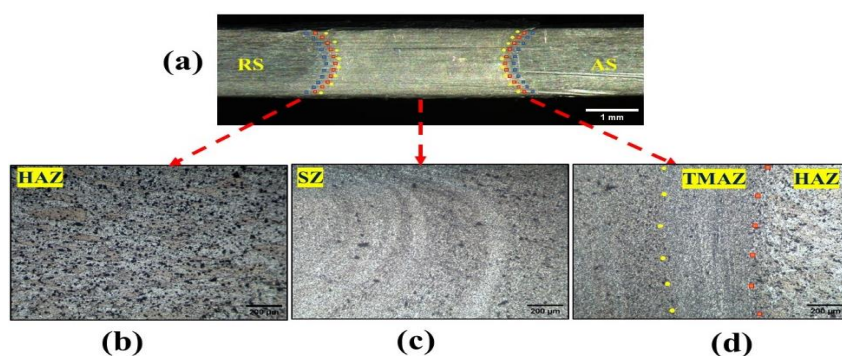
Macro and Microstructure of the cross-section of the optimum welded joint (tool I); (a) macrostructure-stereo image, (b), (c) and (d) OM images of microstructure at different welding zones
